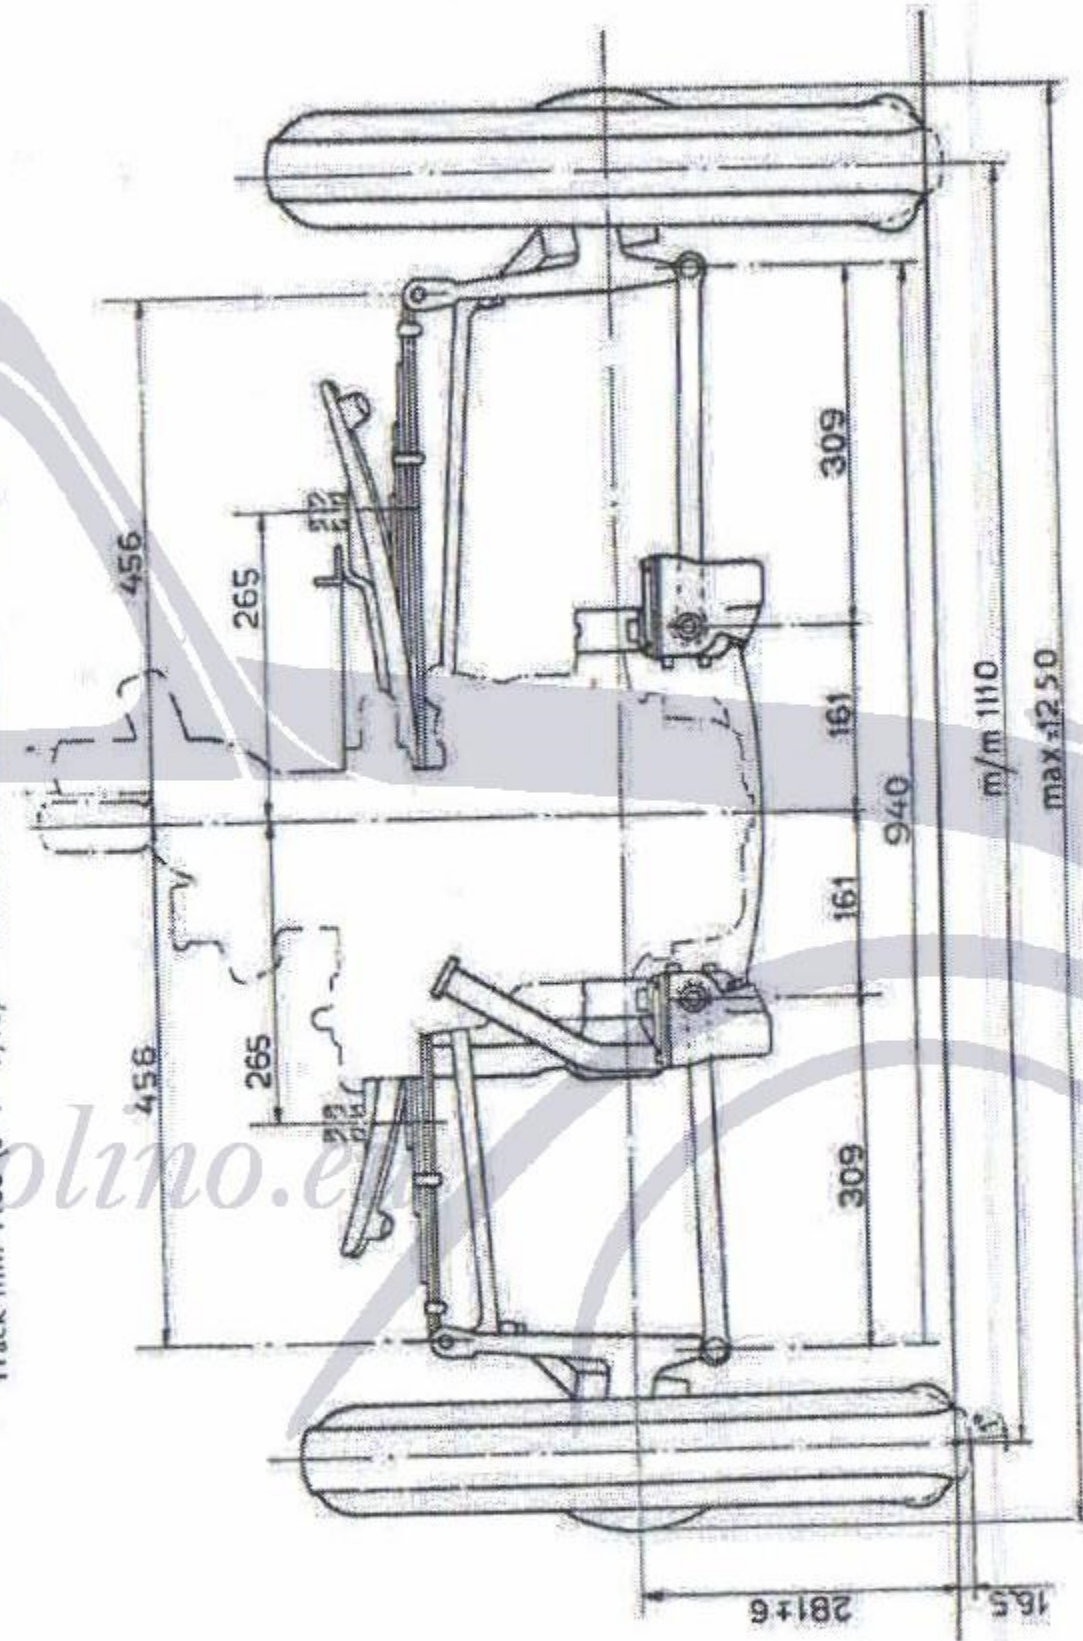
Front view of the front suspension, with data for carrying out the principal tests to be performed with the car under static load.
